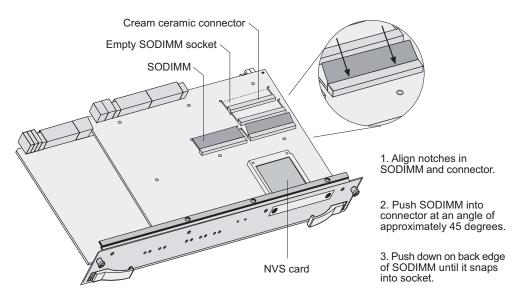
SODIMM sockets on the SRP-5 and SRP-10 module
